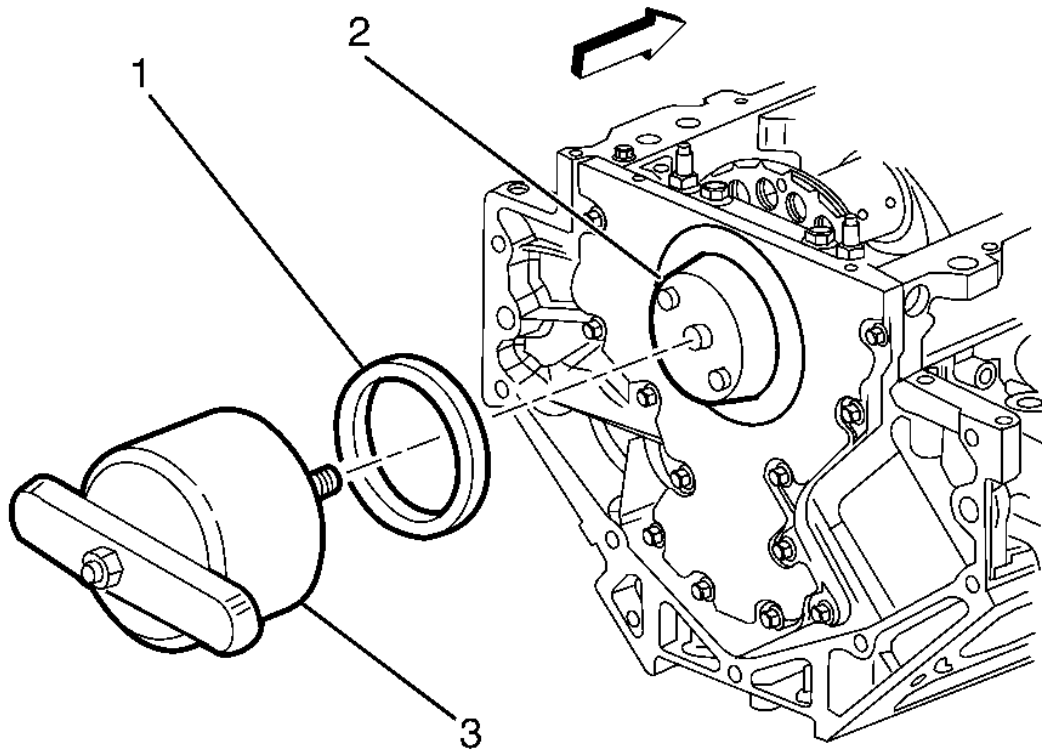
Locating J 41479 Cone, Rear Oil Seal & Rear Cover Bore
